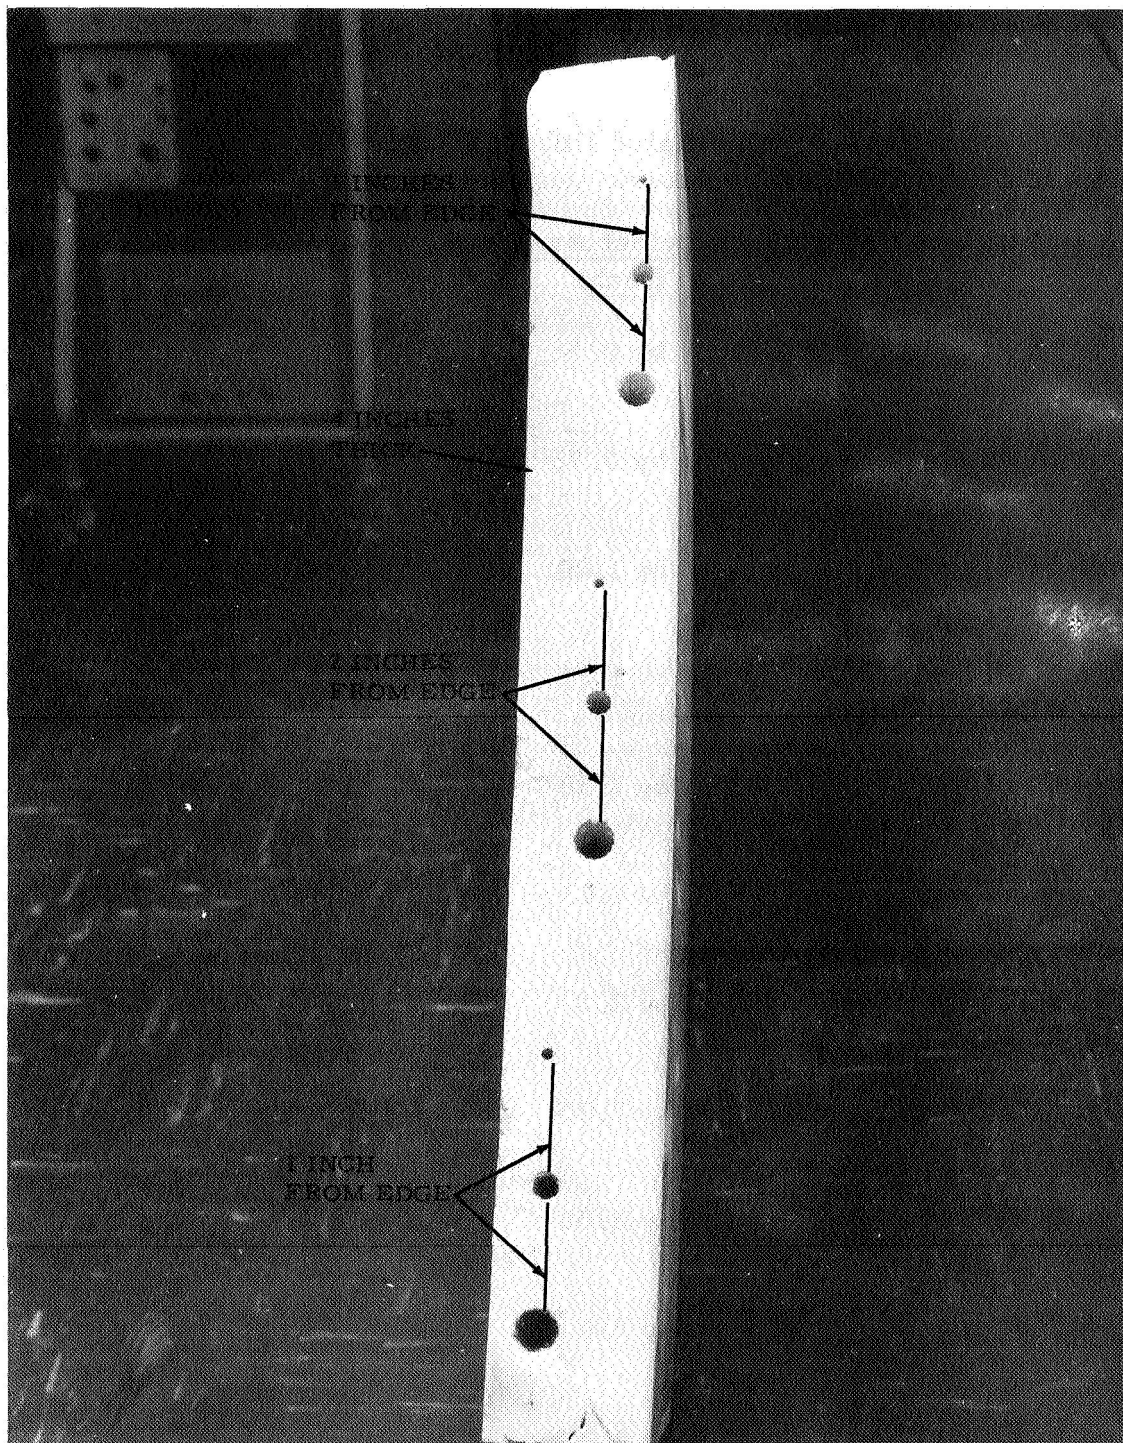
Voids, Drilled Holes, in Test Panel (Typical Example)
